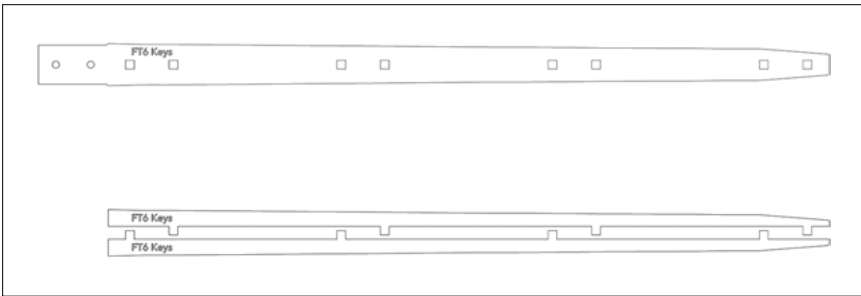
Digital drawing from DWG format files of laser cutting reamers. Drawing by Ricardo Simian.
